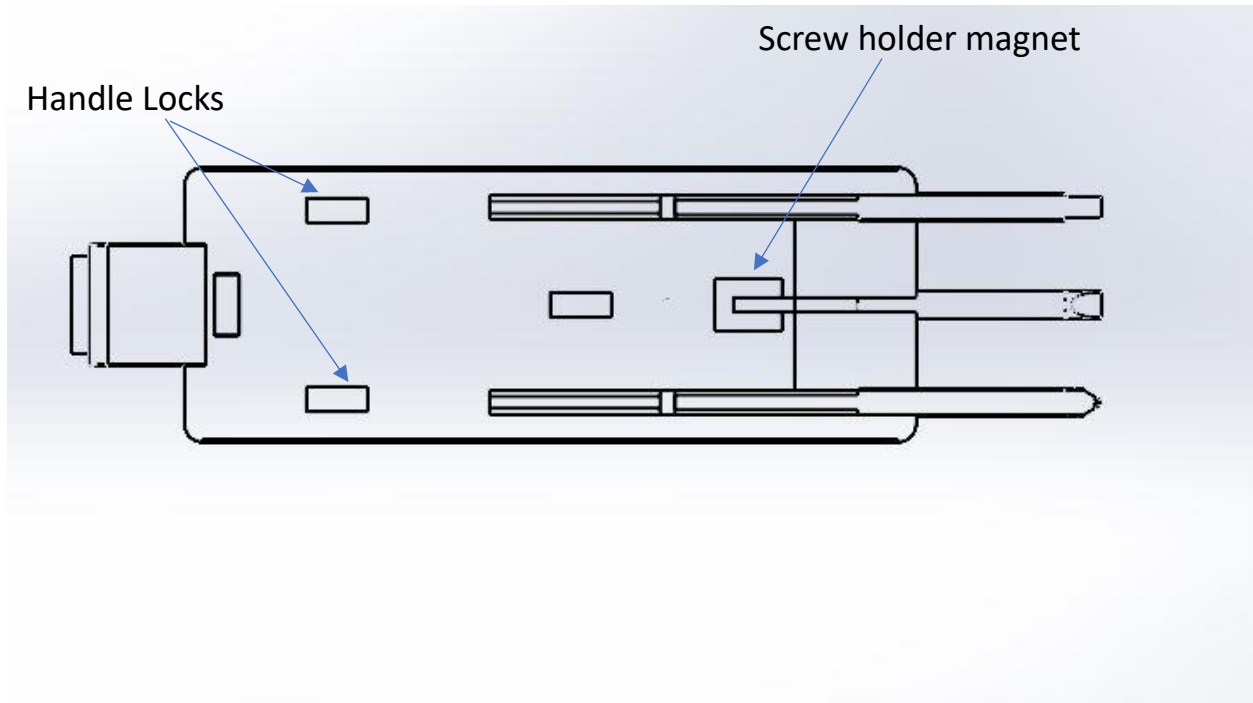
SECTIONAL VIEW OF THE DESIGN
